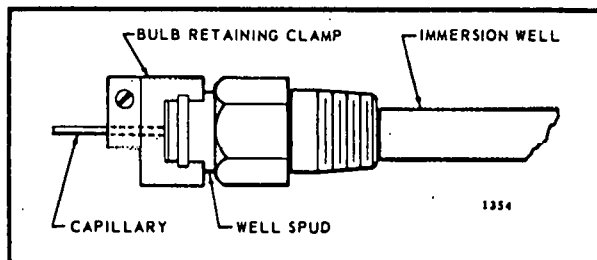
IMMERSION WELL ASSEMBLY FOR MOUNTING SENSING BULB.
